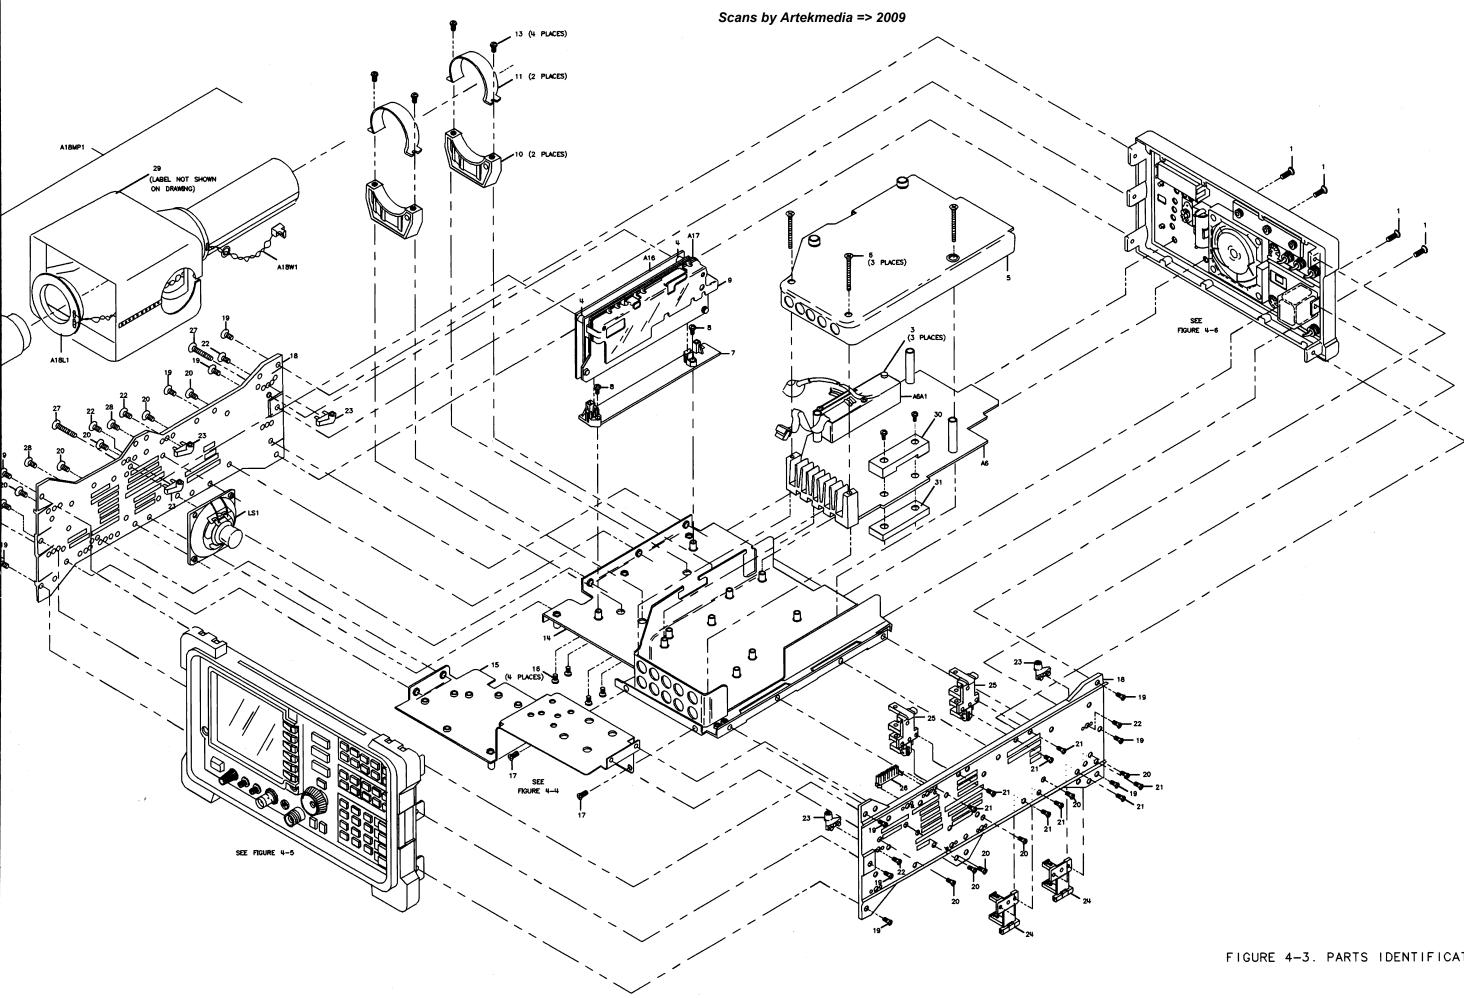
PARTS IDENTIFICATION, MAIN CHASSIS
